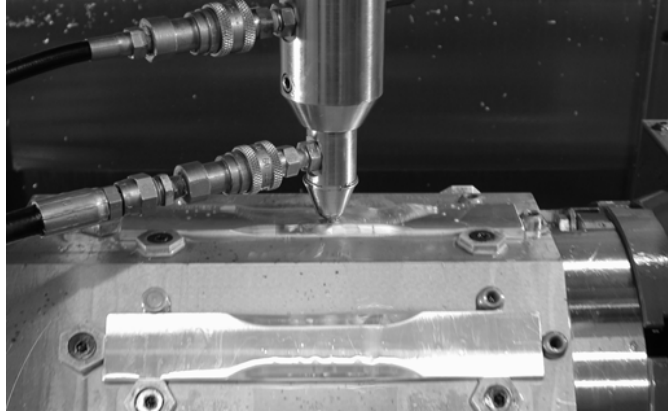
A SET OF 8 FATIGUE SPECIMENS BEING LPB PROCESSED IN A CNC MILLING MACHINE.
